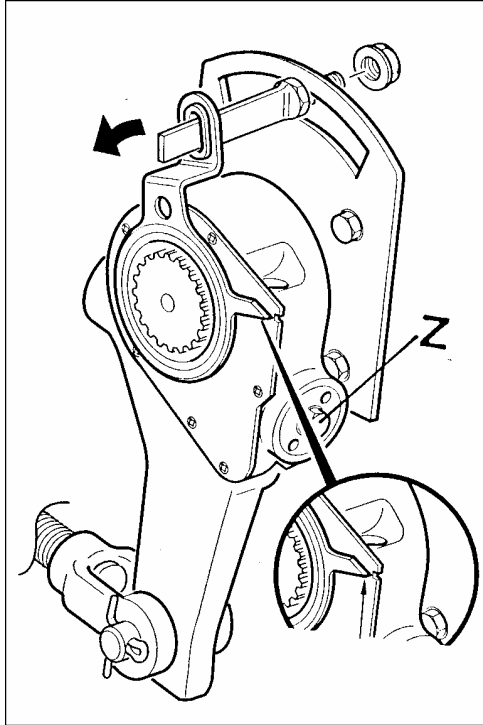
Control Arm Fixed by Offset Pin Shaft
